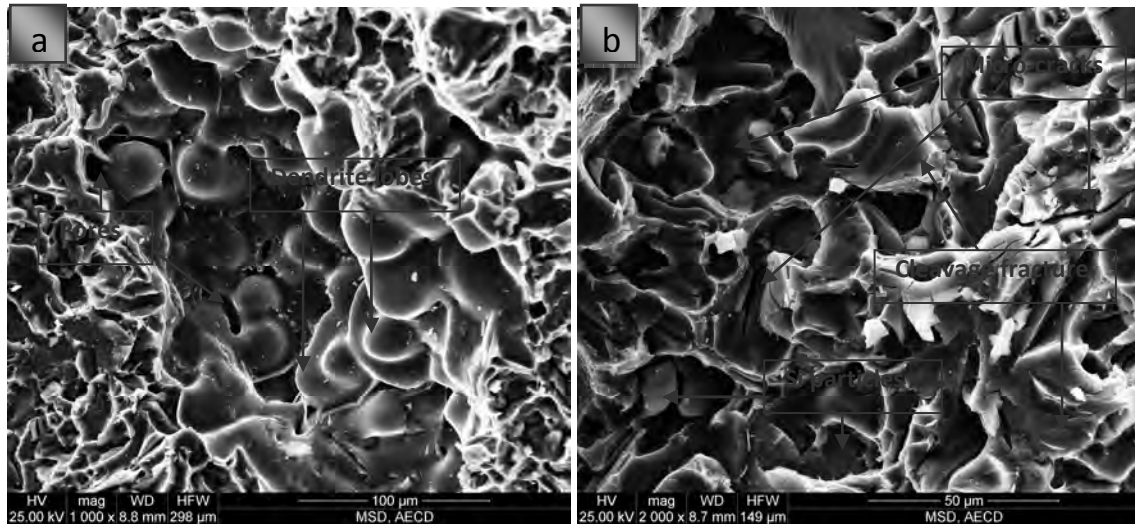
Fracture surface morphology of the peakaged Alloy-4 at a uniaxial tensile strain rate of 10^{-4}s^{-1}
